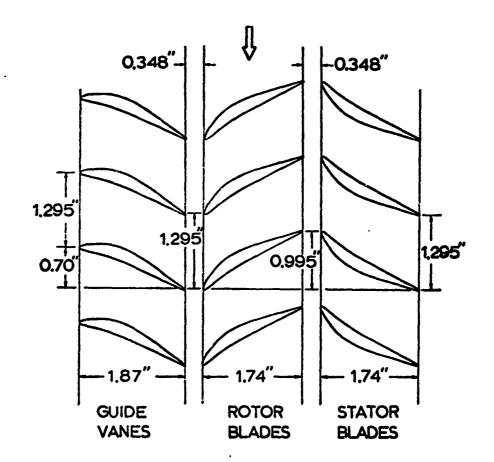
COMPRESSOR STAGE DIMENSIONS
